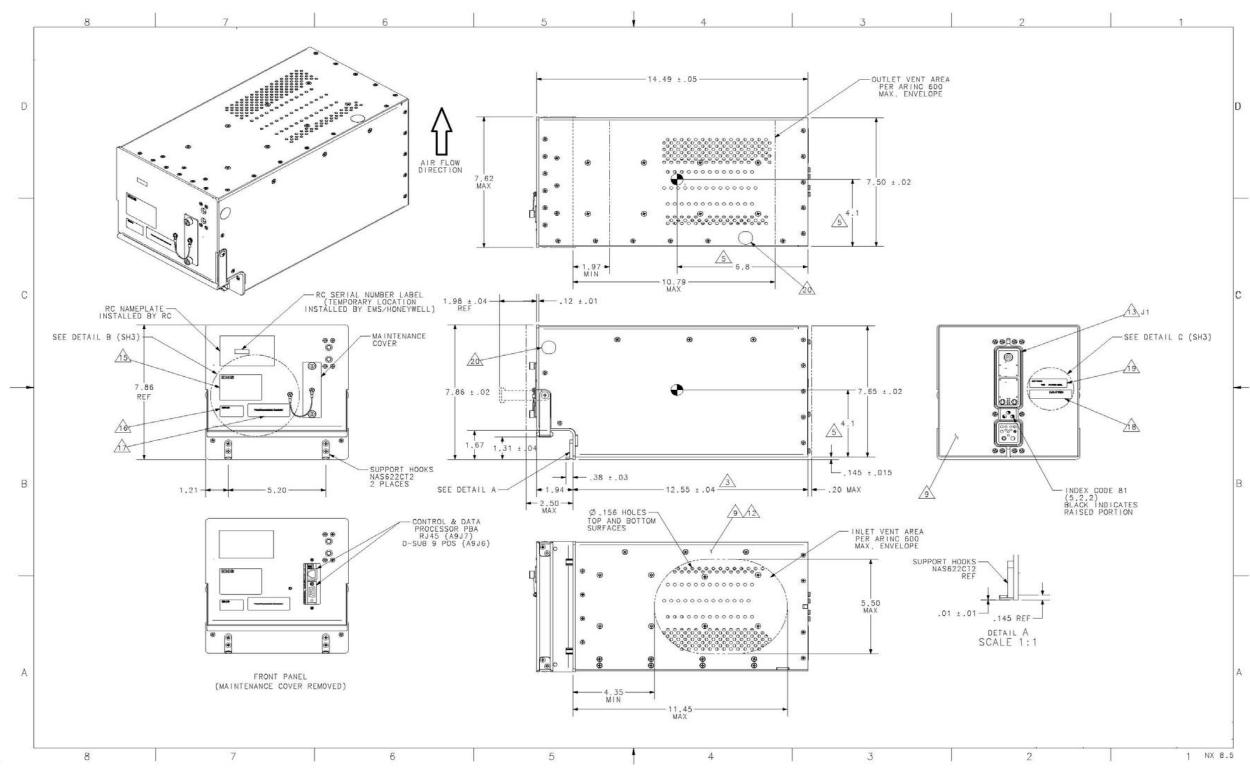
A781-500 SDU Outline and Installation Drawing, PN 90402752 (Sheet 2 of 3)
